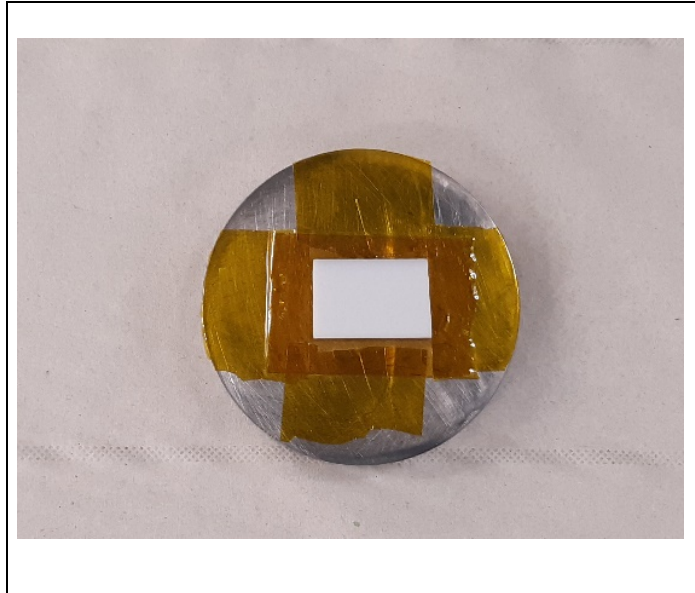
Shows the aerogel fixed on polishing fixture using kapton tape.
